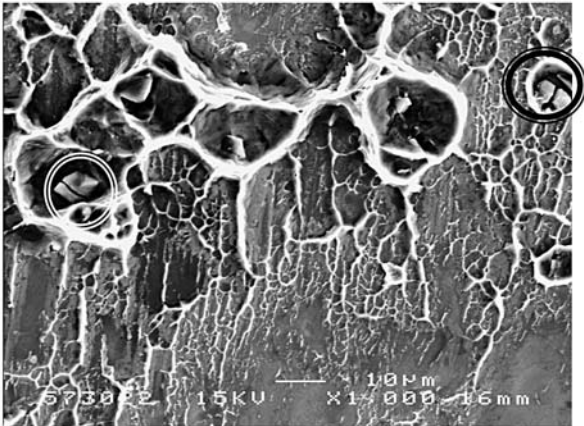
Fracture surface of SS400 in the joint made under the conditions of 2.5s welding time and 588N clamping force.
